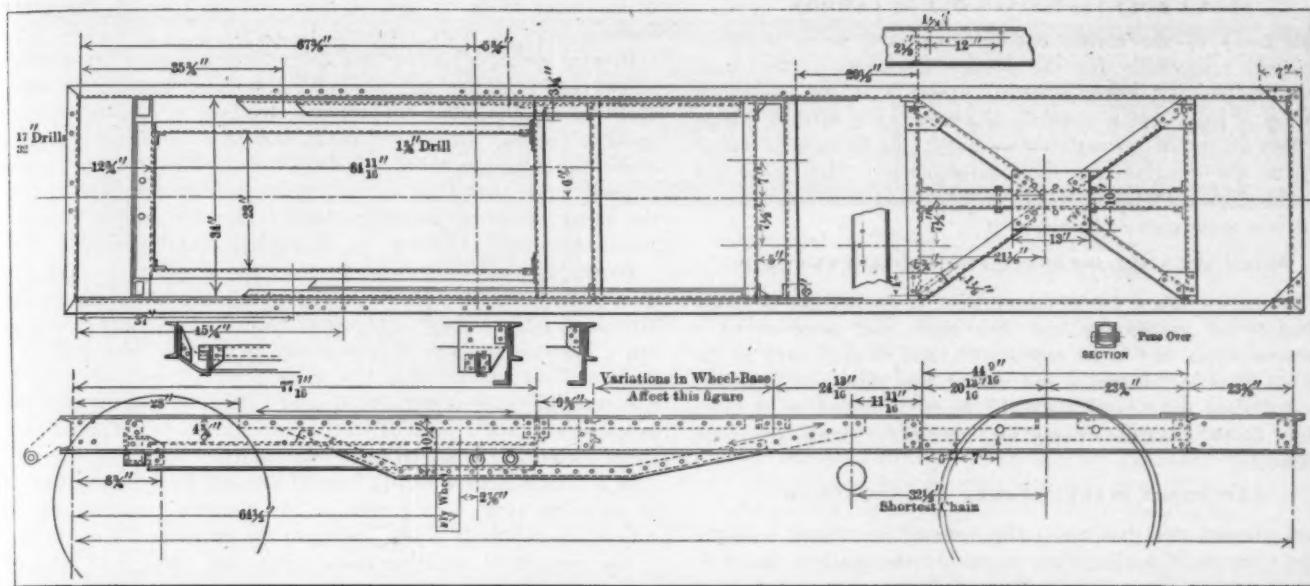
Alden Sampson frame in plan and elevation, channel section with flanges out, designed for heavy trucking service.
